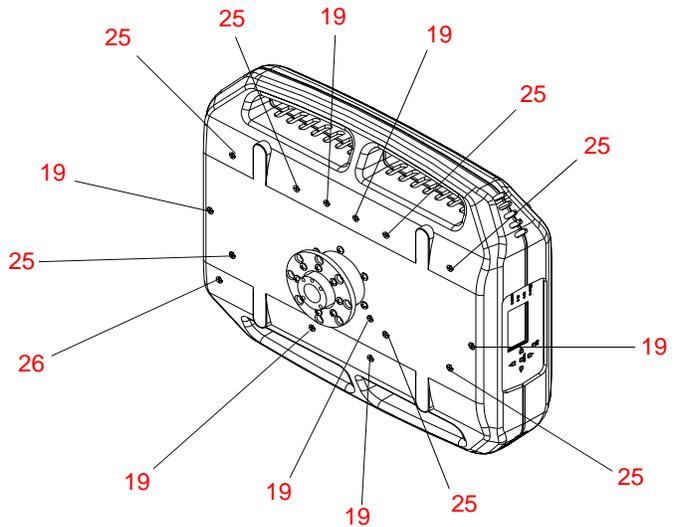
VLX Wash Upper Enclosure Assembly Part 1
